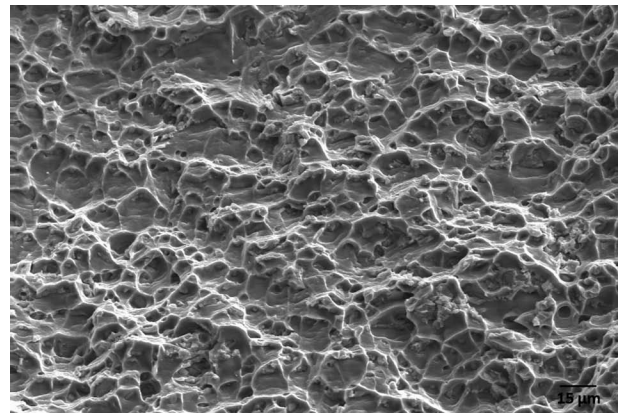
Another view of fracture surface shown in Fig. 126 taken at higher magnification with dimples throughout
